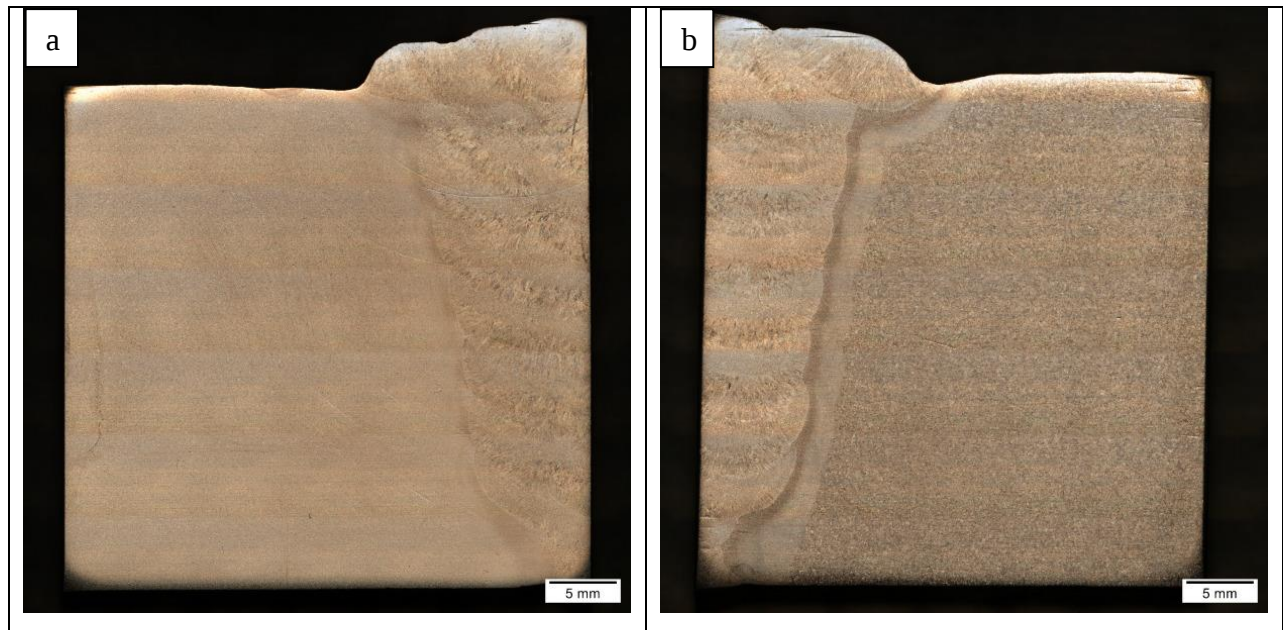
Macrographs indicating the weld metal, HAZ and parent material of (a) the P91 weld filler metal, P91 parent material side and (b) P91 weld filler metal, X20 parent material side.
